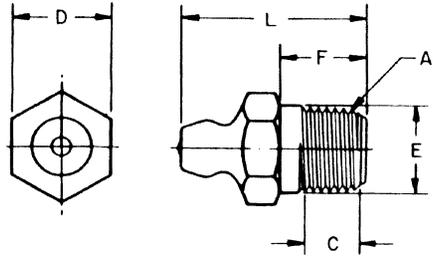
A—EXTERNAL TAPER PIPE THREAD
